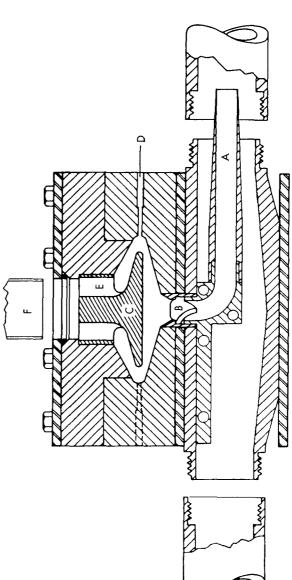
Internal View of Manifold Pickup Section Showing Flow-Spiraling Impeller.
